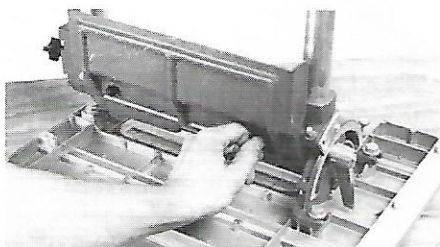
The tie bar shield will slip into position over thumbscrew heads. Be sure to tighten screws securely.
